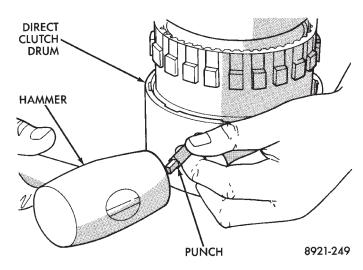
Marking Direct Clutch Drum And Annulus Gear For Assembly Alignment
